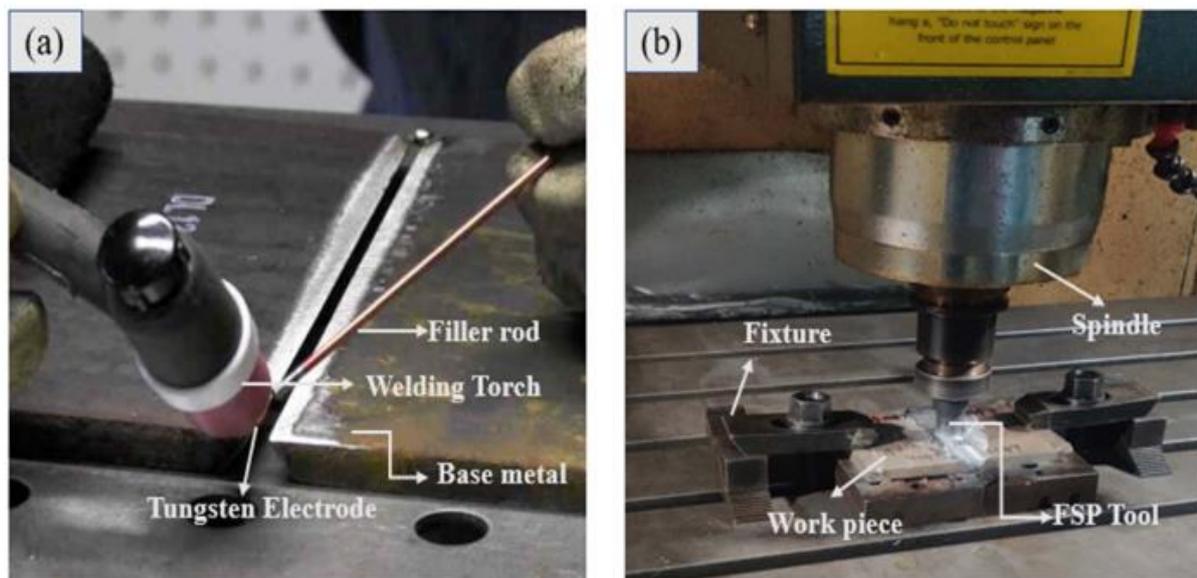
Welding process configuration of (a) TIG and (b) FSP.
